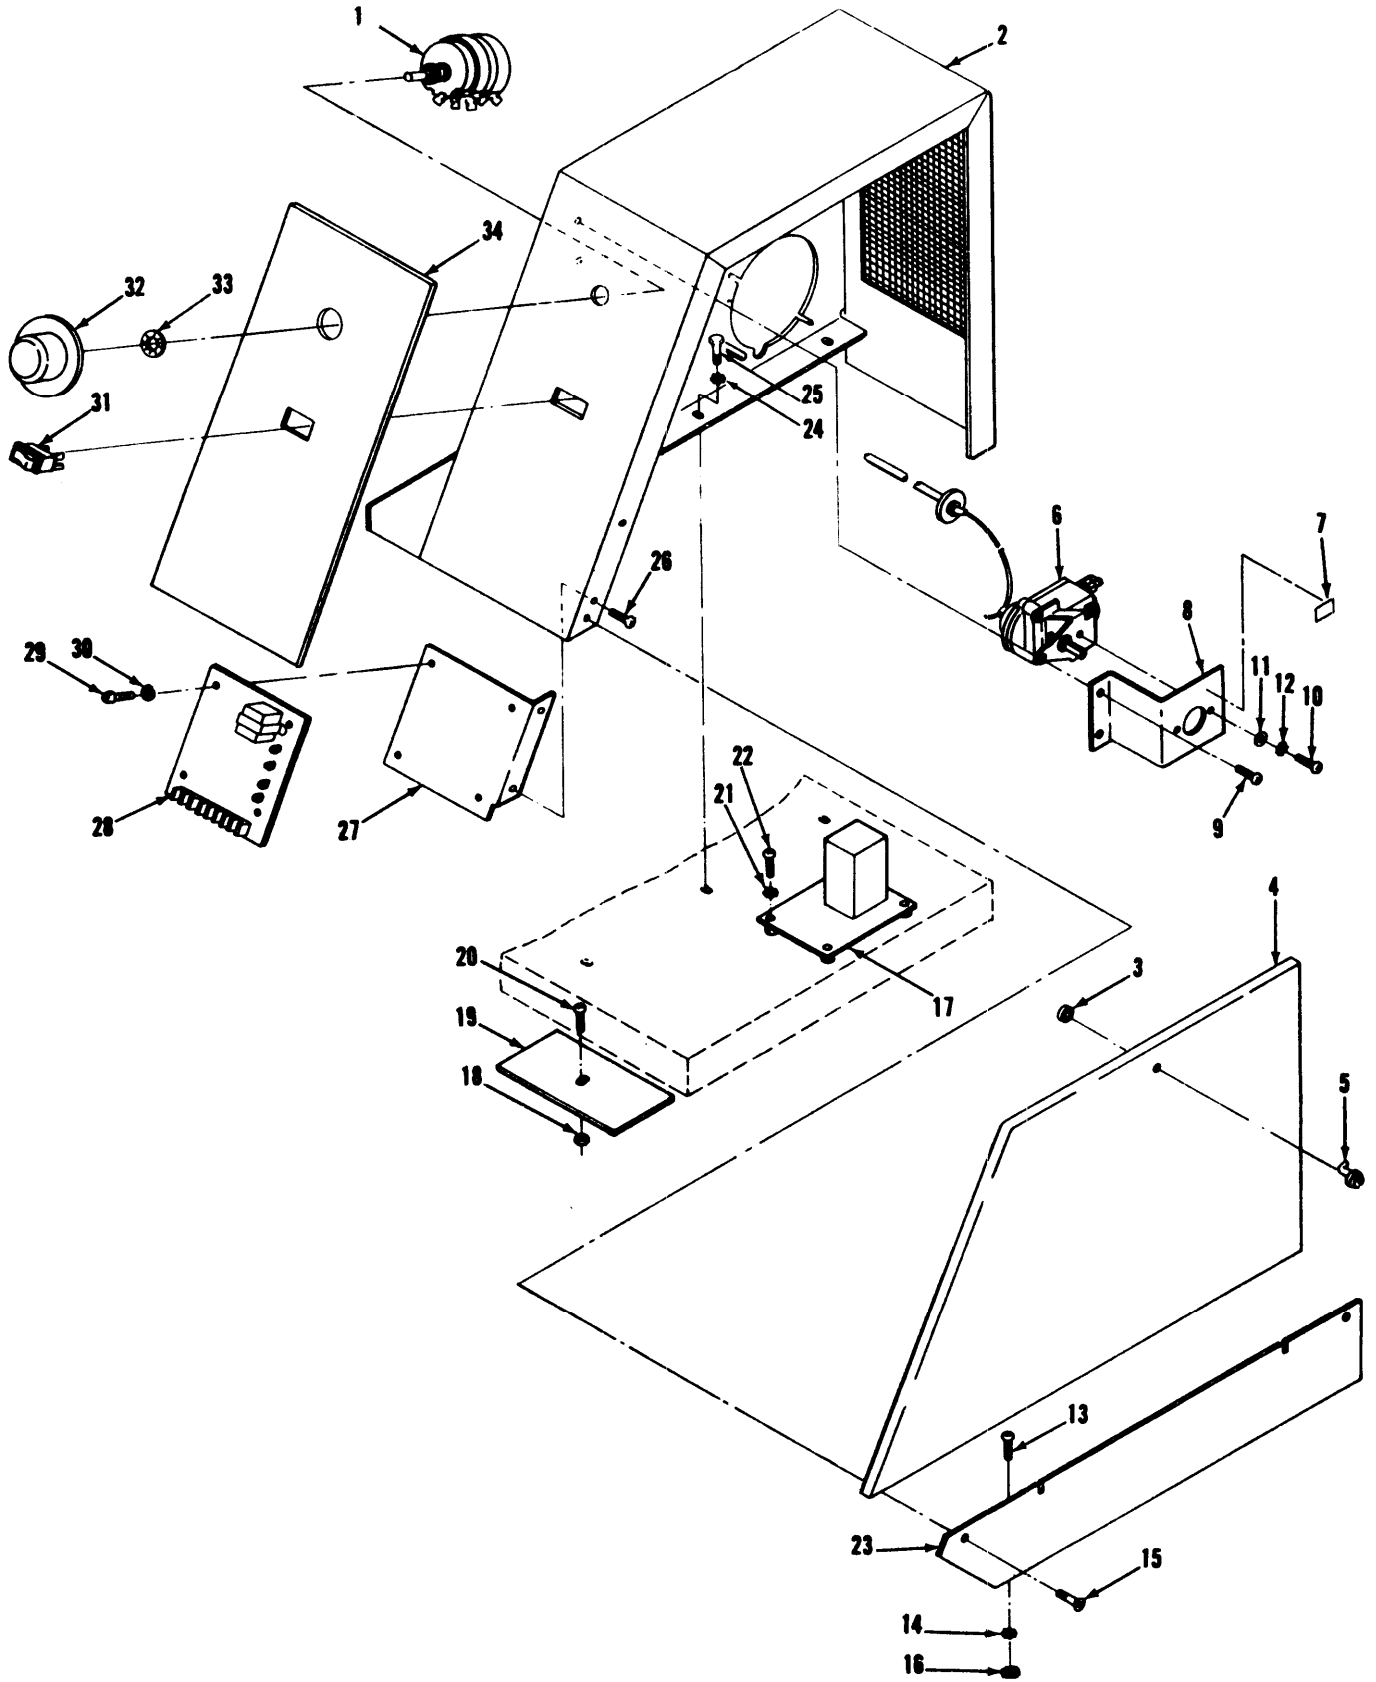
Machine Cabinet Group (Sheet 1 of 4)
